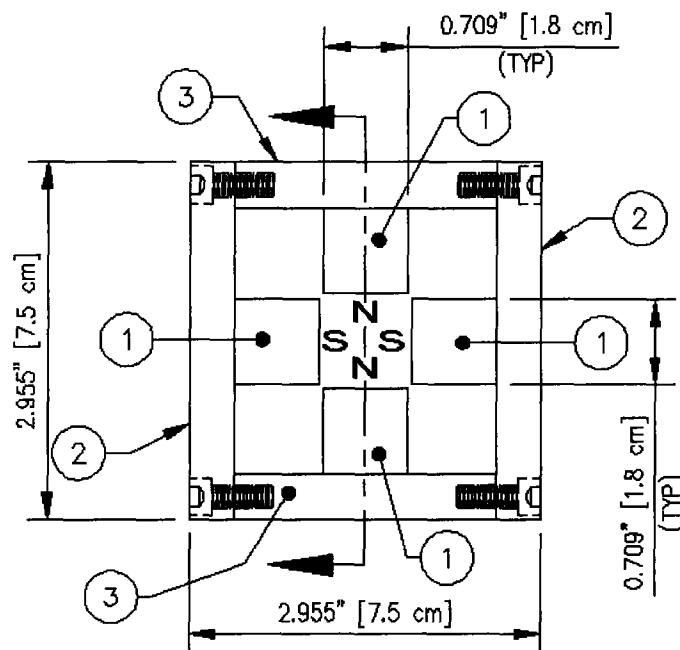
Technical schematic of the four permanent magnets and their stainless steel housing box, top view, where 1 indicates the magnets, 2 and 3 indicate the stainless steel plates needed to construct the housing box for the magnets, and N/S indicates the polarity of the magnetic field for each magnet in the finished magnet assembly.
